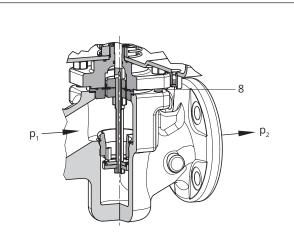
Type 2405 Pressure Reducing Valve with pressure balancing · Nominal size DN 32 to 50 · Set points 0.005 to 0.060 bar · Flow-to-open (two-step control mode)
